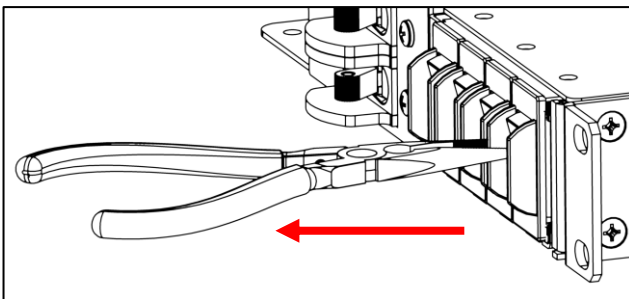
Circuit Breaker Removal Using an Appropriate Tool
